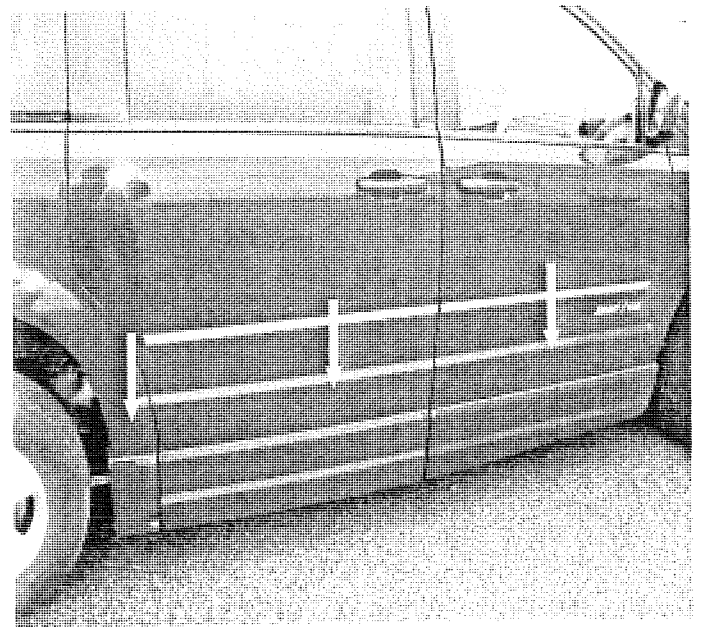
SIX-PIECE BODY FLARE KIT
